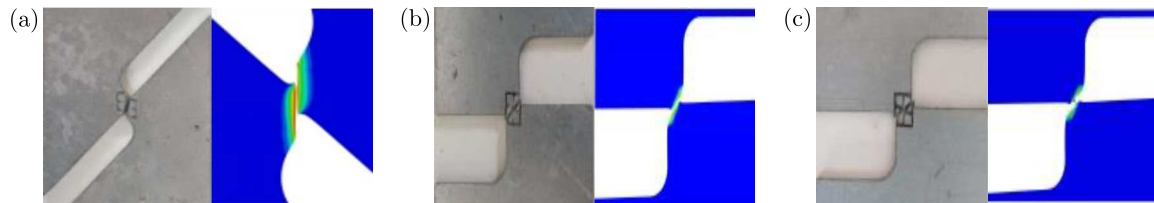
Comparison of sample fracture morphology between the simulation and experiment: (a) pure shear specimen, (b) 45° tensile-shear specimen, (c) 60° tensile-shear specimen
